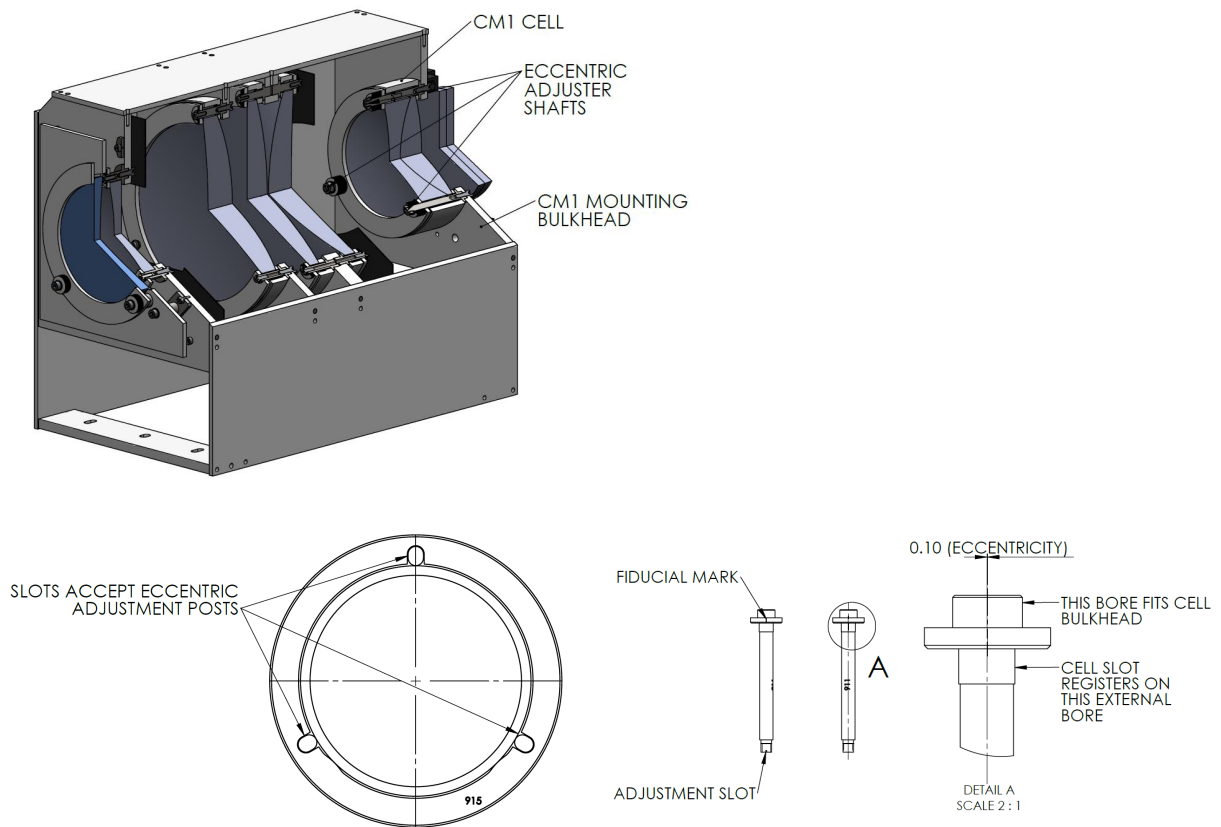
Cutaway view of Veloce Rosso Channel Camera assembly (top), CM1 lens cell showing slotted holes that mate with eccentric shafts (bottom left) and detail view of eccentric adjuster shafts to control position of CM1 Cell (bottom right).
